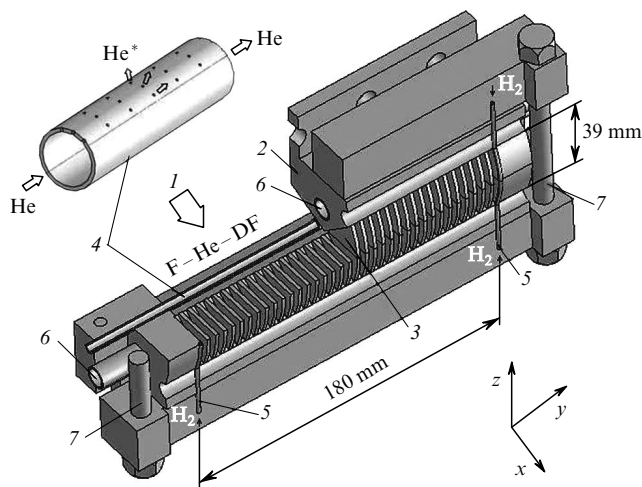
Design of the modified nozzle block of an A type HF laser: (1) flow of combustion products from the gas generator chamber; (2) nozzle block; (3) slotted supersonic nozzle; (4) special injector for injecting secondary inert diluent (helium); (5) injector tube for supplying secondary fuel (hydrogen); (6) coolant (water) channel; (7) bracing bolt.
